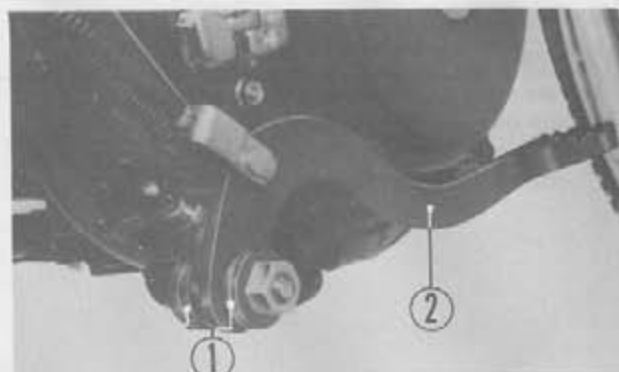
① Pedal shaft seal ② Brake pedal
